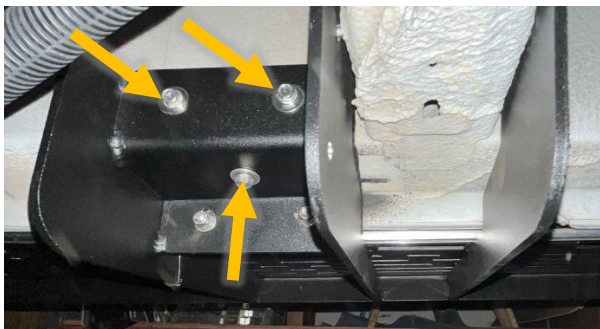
Step Bracket Installation Behind Pinch Weld
